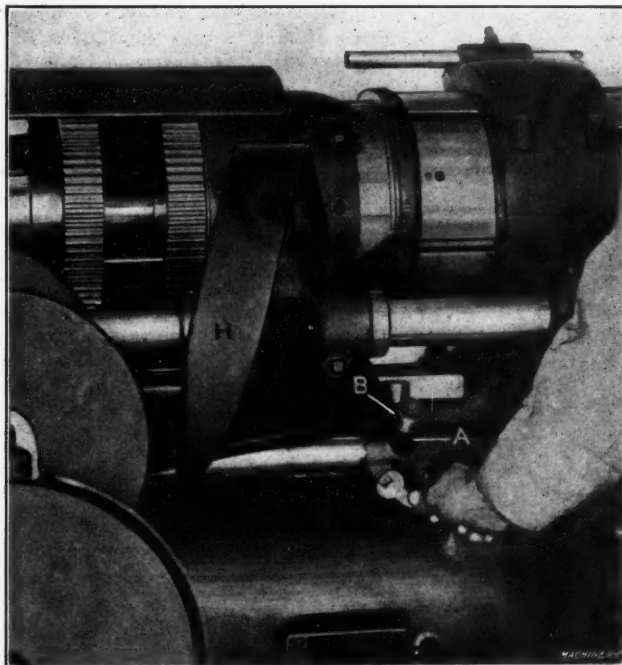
The Stock Feeding Mechanism should be set to give a Greater Length of Feed than that actually required
